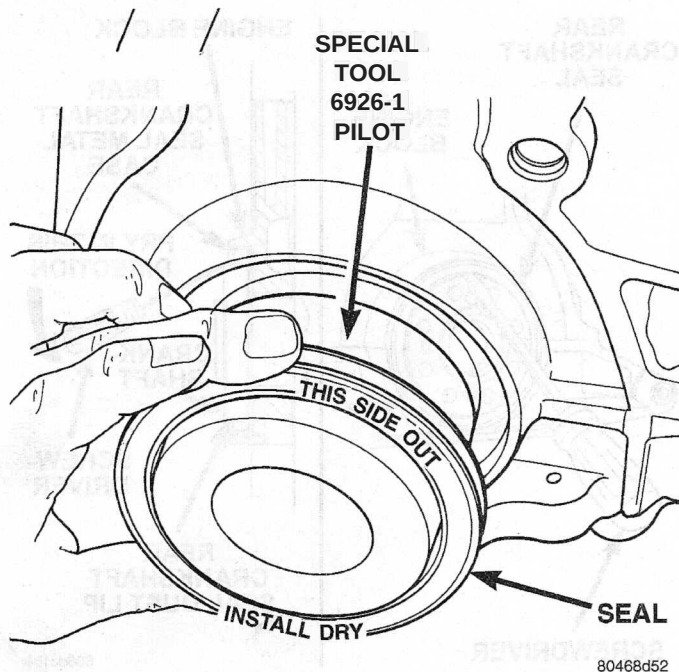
Rear Crankshaft Seal and Special Tool 6926-1
